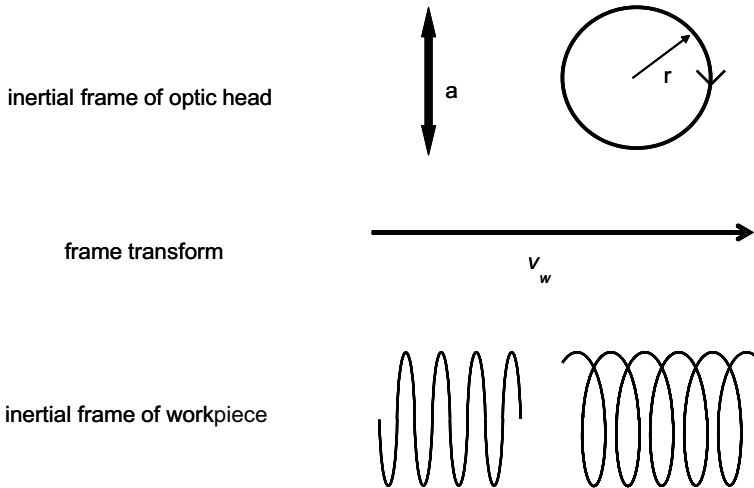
Path of the modulated beam as viewed from the inertial frame of the optic head and from the inertial frame on the workpiece; left: oscillation laser welding; right: LSW
